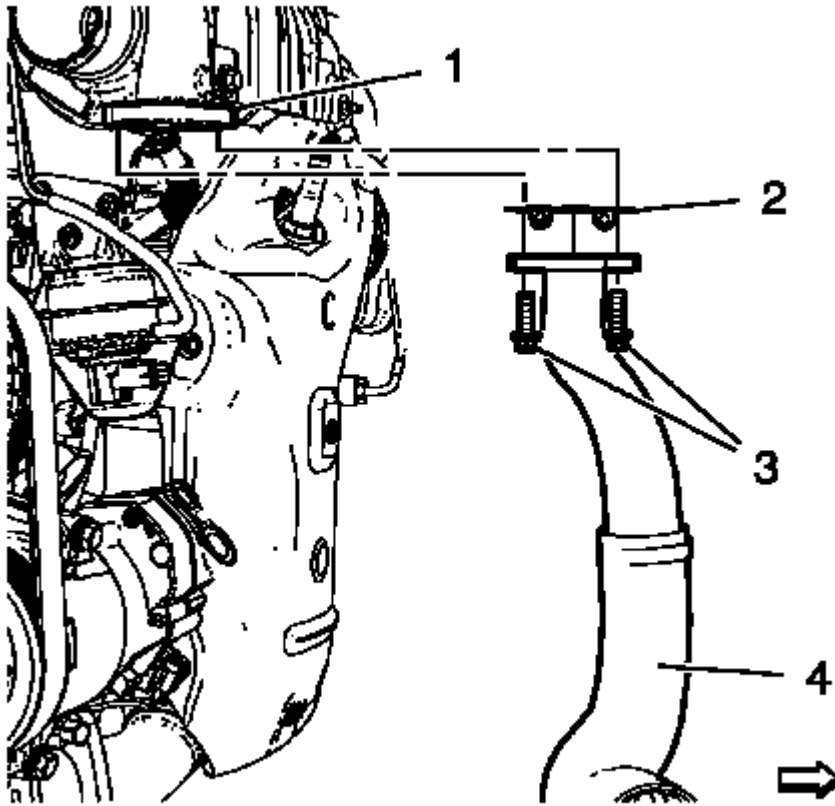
Charge Air Cooler Inlet Air Hose
